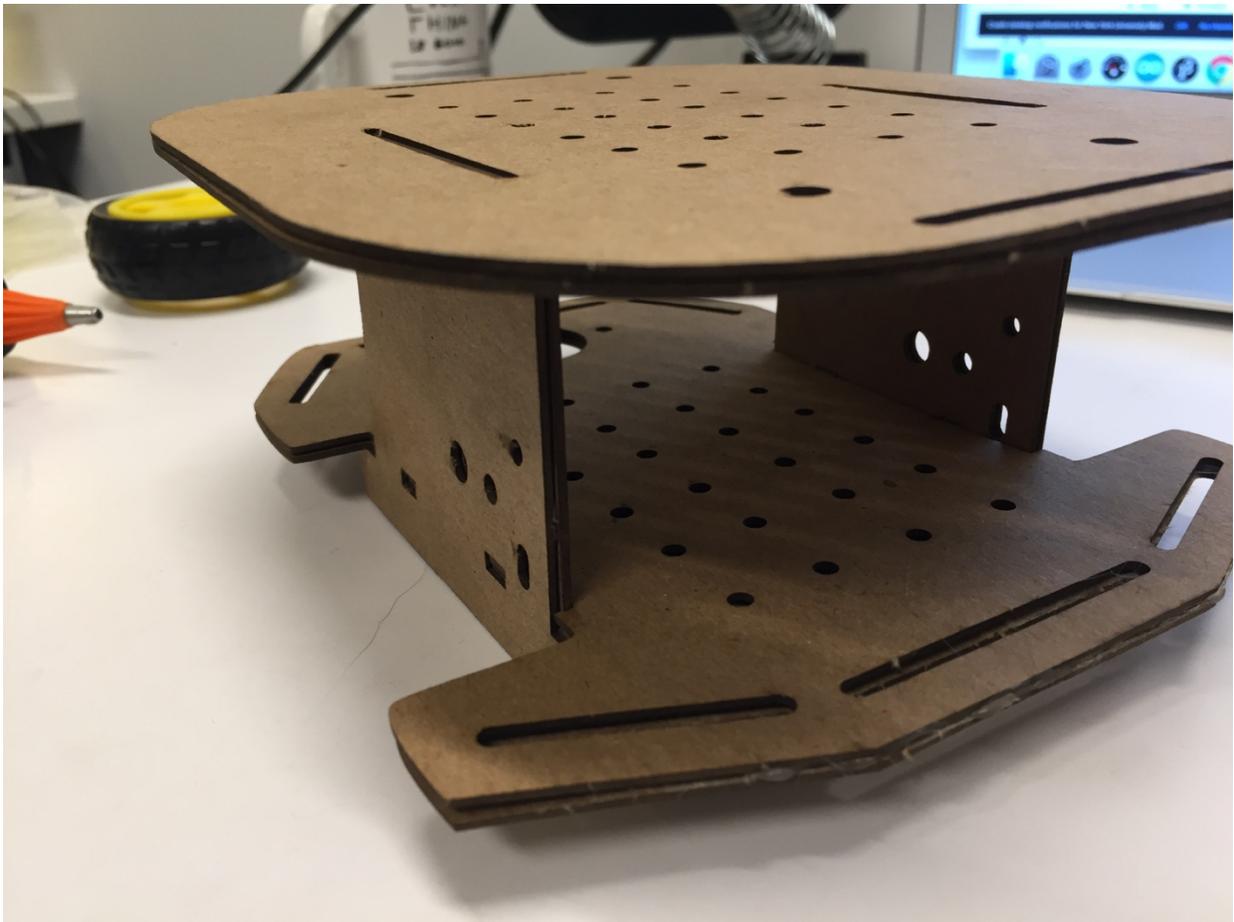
Assembled chassis using laser cut cardboard. *Kathleen McDermott, 2018.
